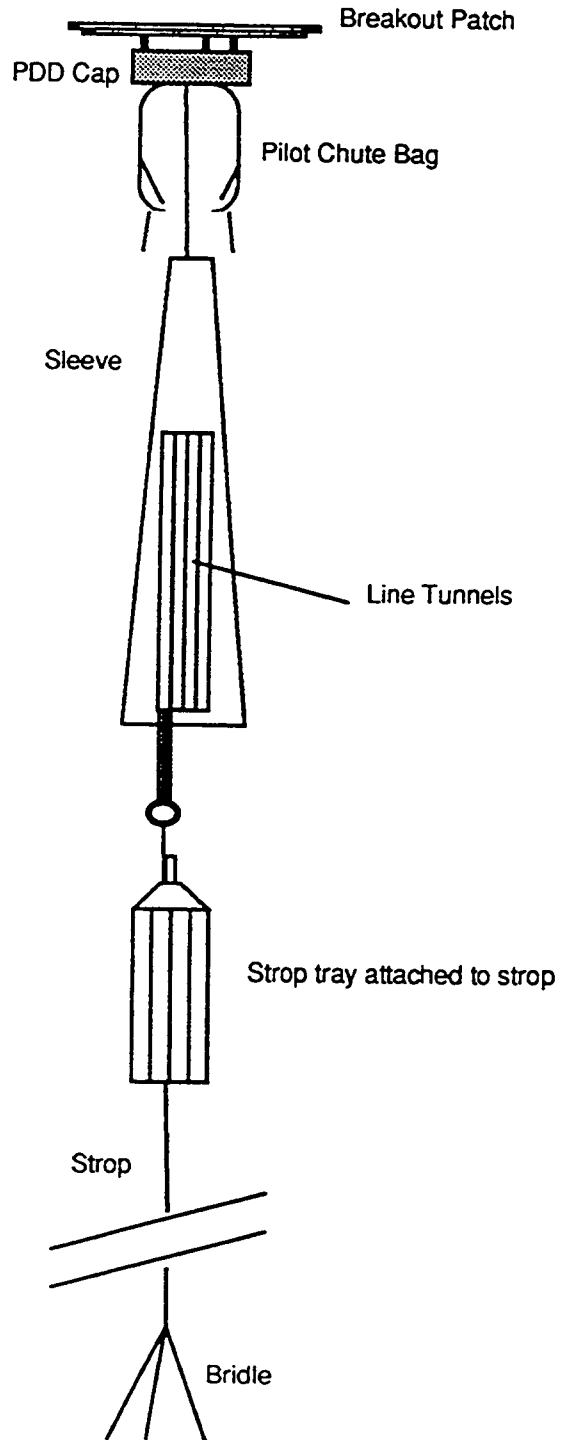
PILOT CHUTE DEPLOYMENT ASSEMBLY
